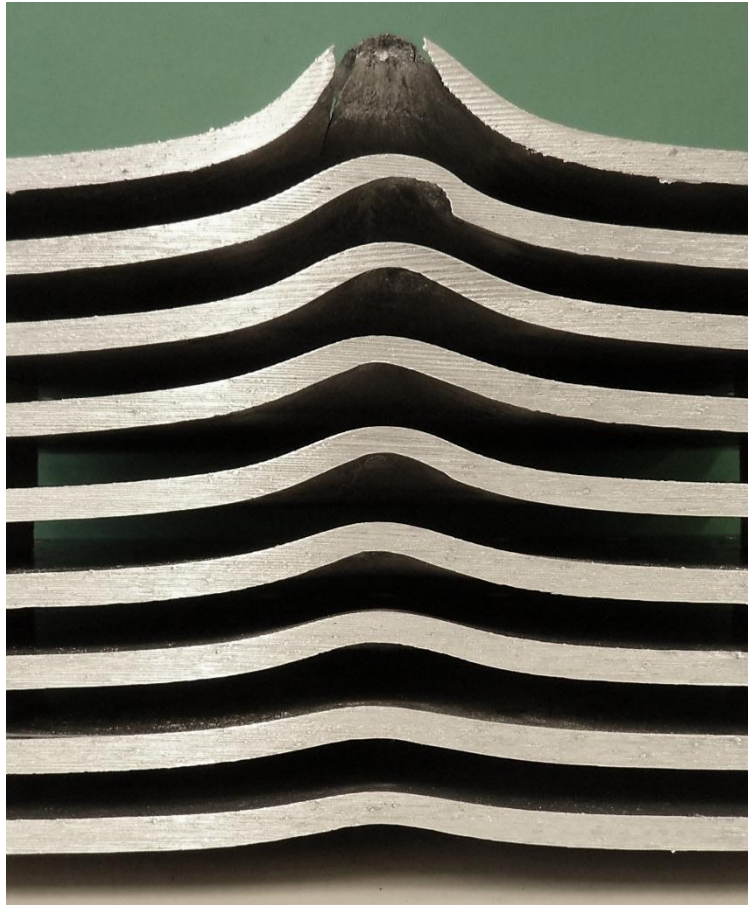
Close-up photograph of AL-5 showing mid-point fracture surface with pitting and melting visible
